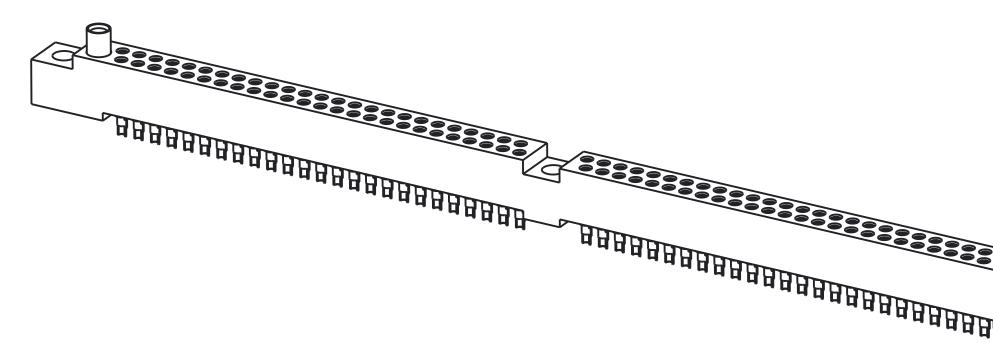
RECEPTACLE CONNECTOR, SOLDER CUP SOCKET CONTACTS (2 BAY)
